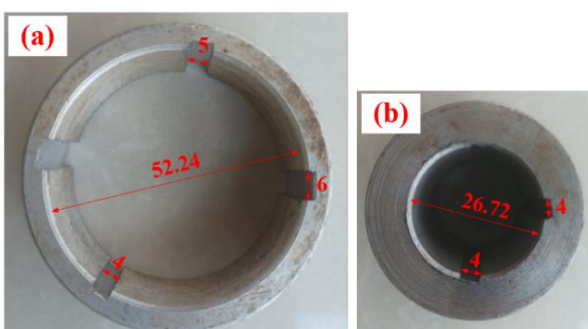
Internal keyway specimens after machining using the integrated slotting mechanism: (a) Aluminum; (b) Carbon steel C35.
